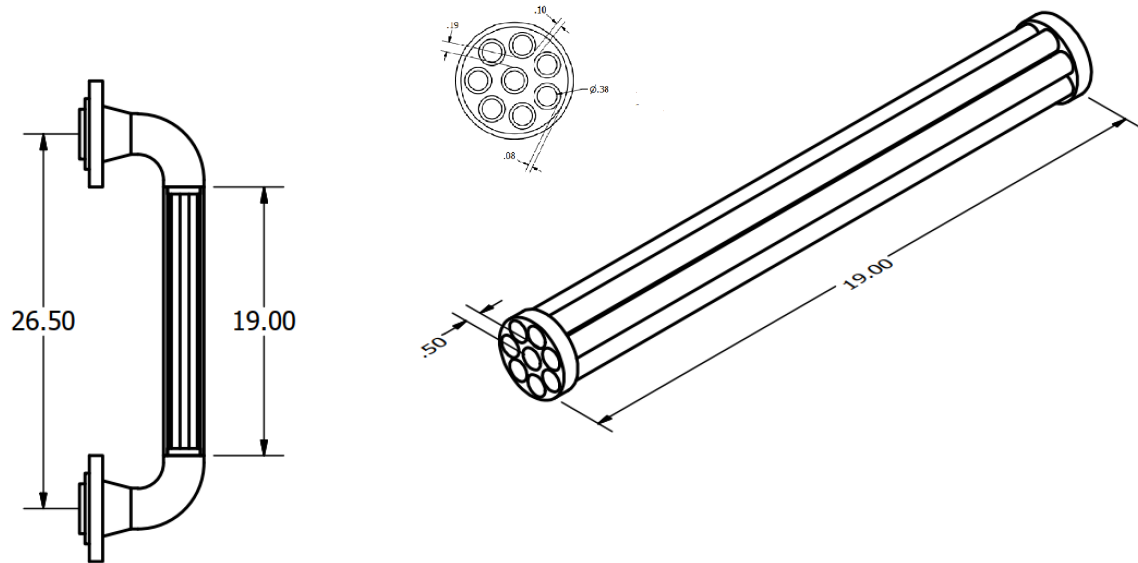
Drawing of the heat exchanger, tube bundle, and bundle plate.
